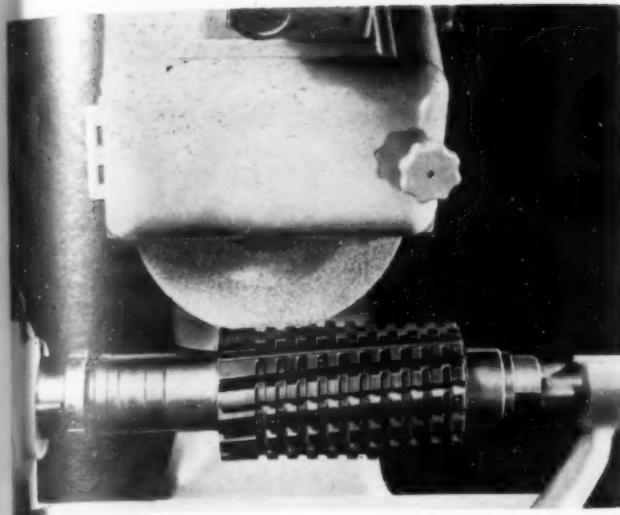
(top left) In making a setup for hob sharpening, the arbor must fit snugly to avoid runout.
